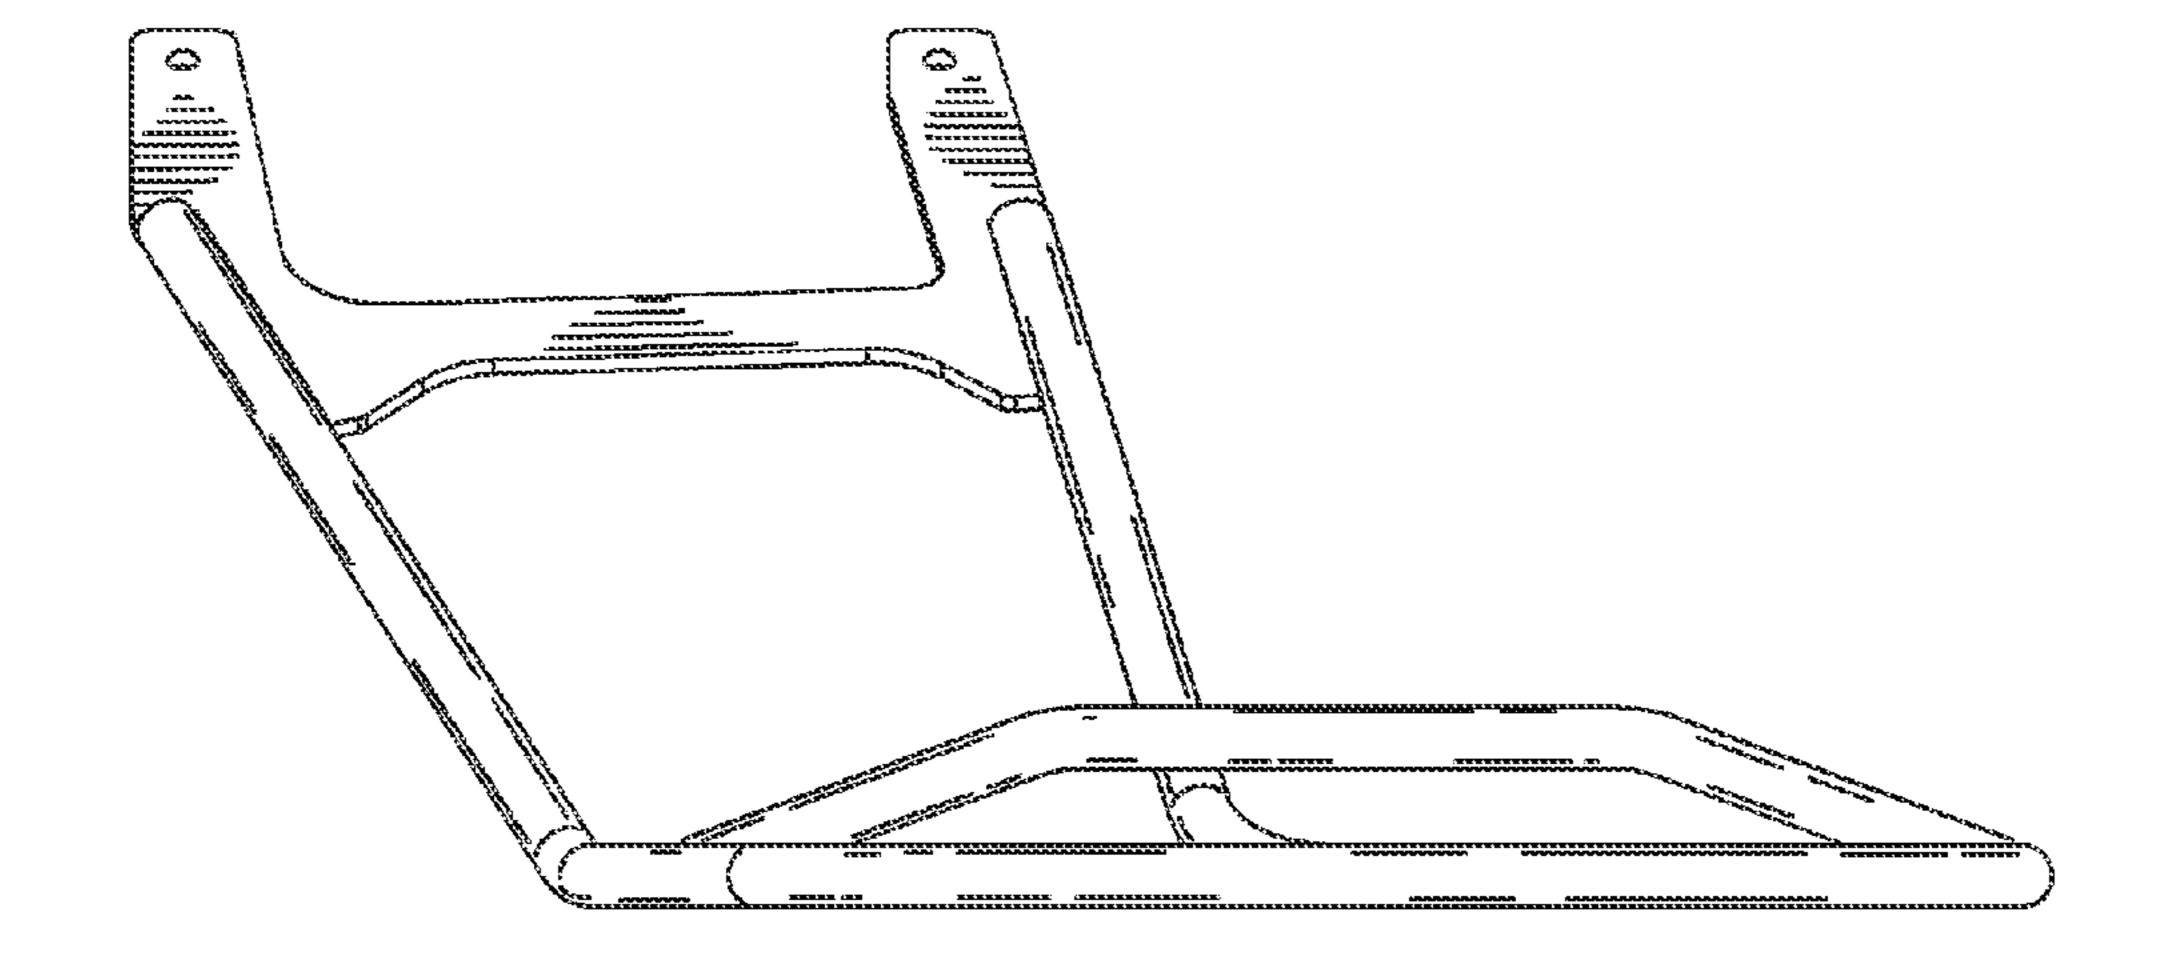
is a further perspective view onto the rear side of the design for an extension arm for a road construction machine of FIG. 1.
